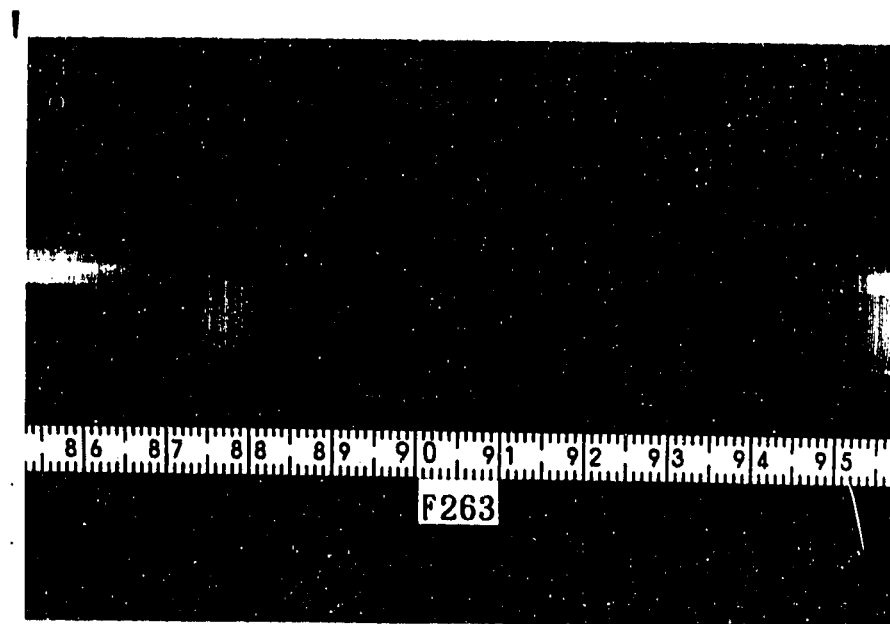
Appearance of fatigue test piece after failure - F263
